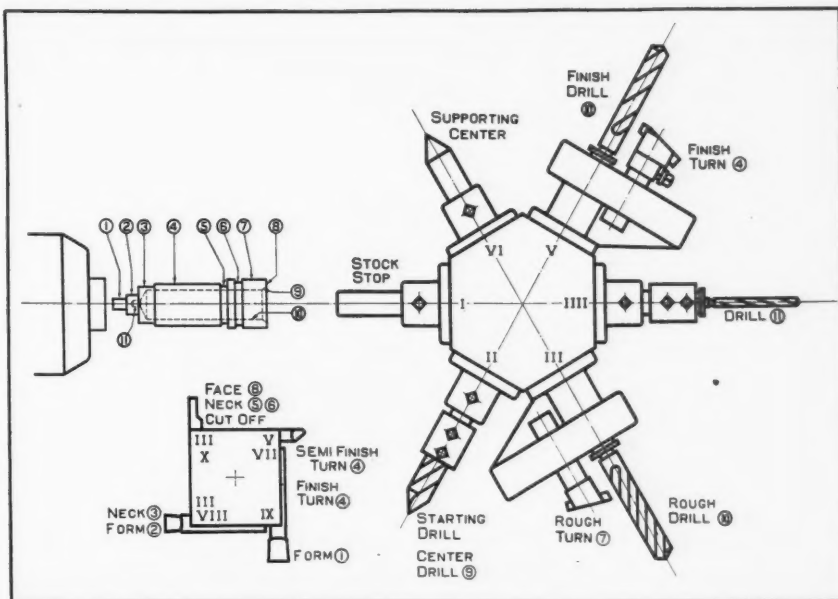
Suggested Tooling Lay-out for Machining Suction and Discharge Valve in Lots of One Hundred on a Turret Lathe
